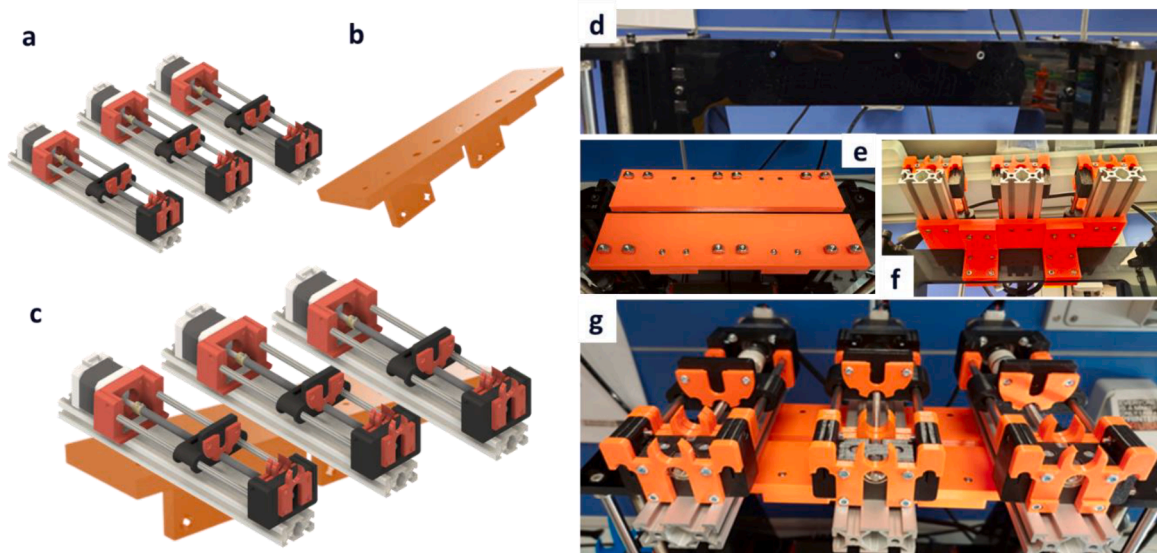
Assembly of the syringe pumps on the printer: (a) Render images of the syringe pumps. (b) Engineered support to house the syringe pumps. (c) Render images of the assembly. (d) Detaching the display to create space for the syringe pumps. (e) The engineered supports are installed on the top of the printer to house the syringe pumps. (f) Bottom view of the syringe horizontal and vertical syringe supports. (g) Top view of the installed syringe pumps on the 3D bioprinter.
